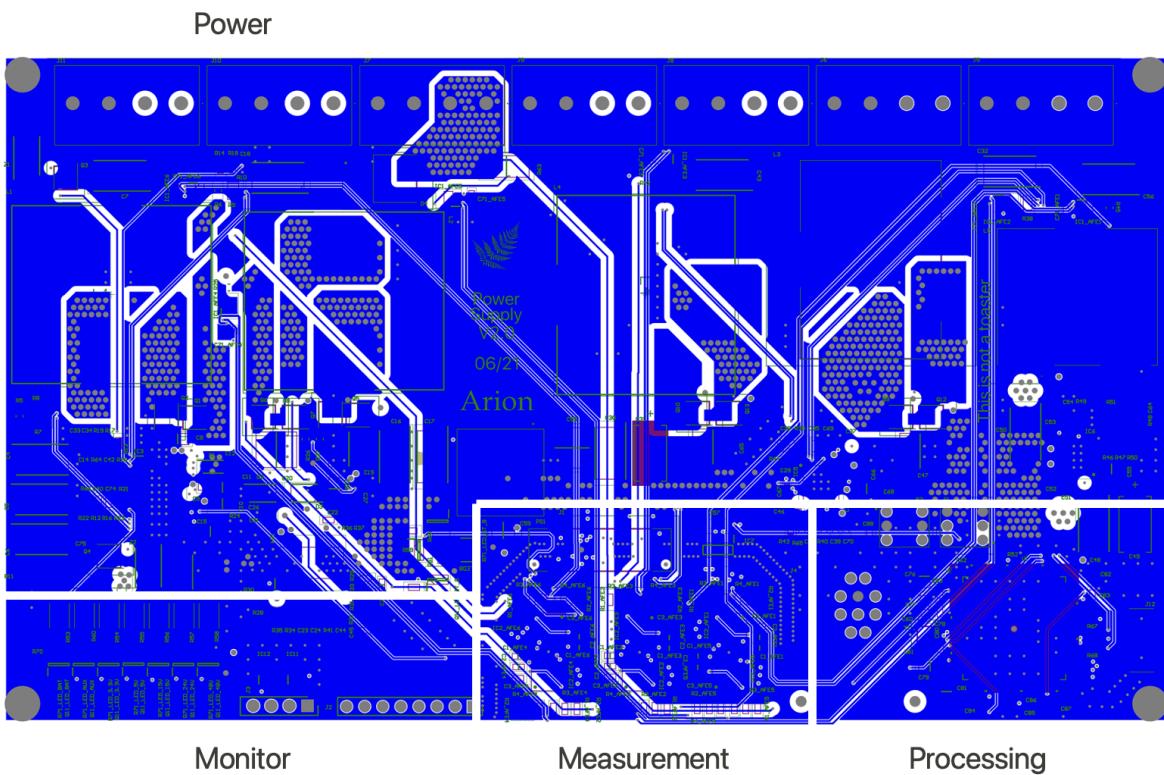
Signal layer 2 (SL2) of the final PCB design (PowerModule.PcbDoc)
